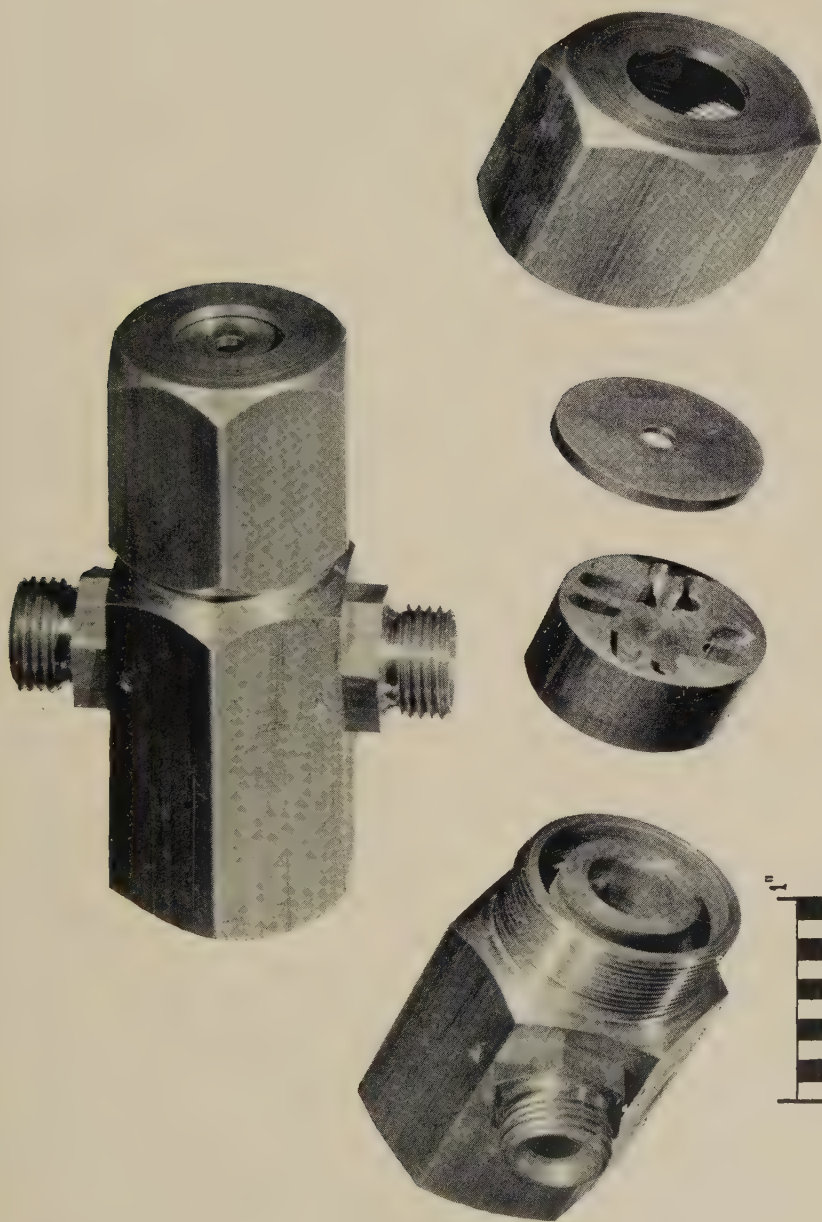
The twin fluid nozzle, showing assembled nozzle and component parts.
